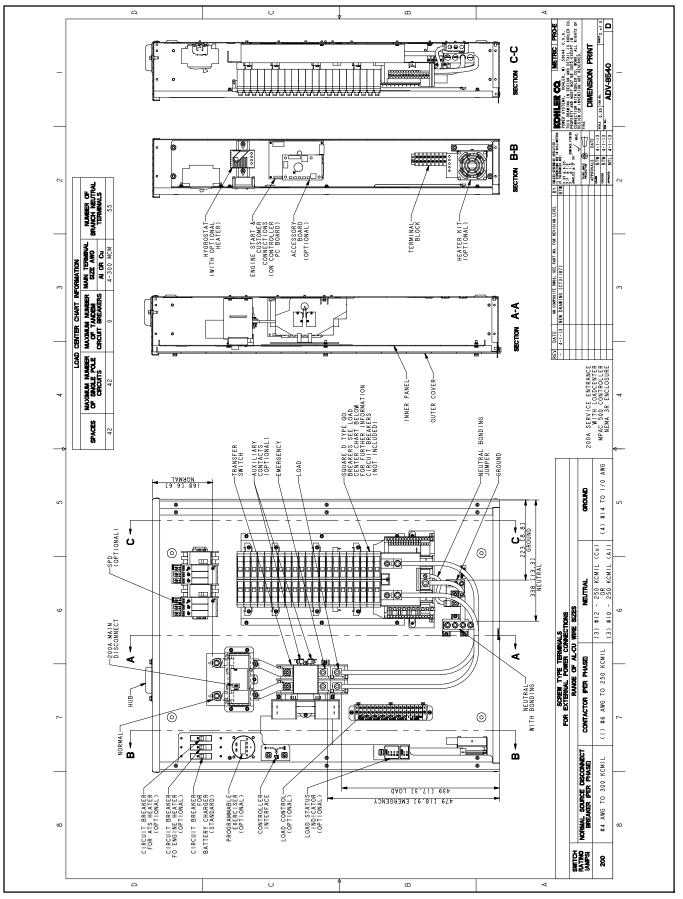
Dimension Drawing, 200 Amp Service Entrance Model with Load Center, ADV-8540, Sheet 2 of 3
